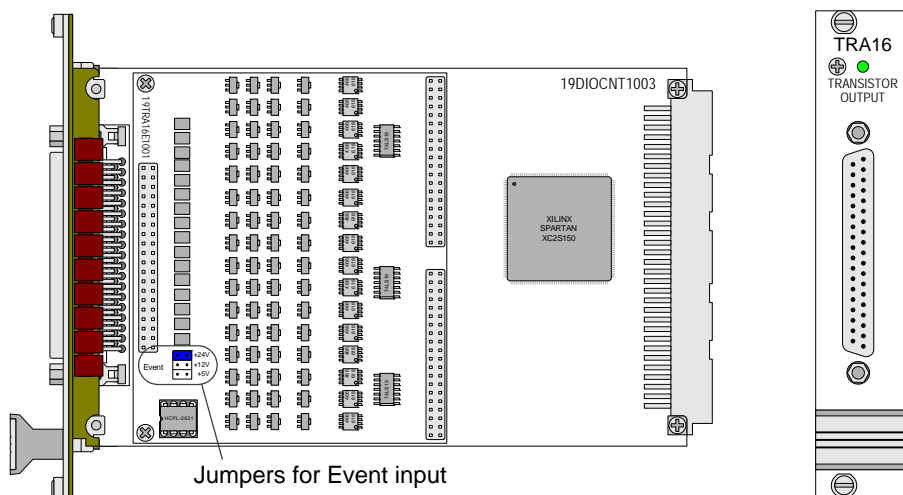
Pro II-TRA-16 Rev. E: Board and front panel
